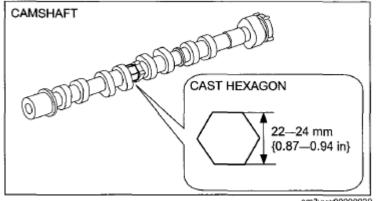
Ensuring Clearance Between Cam/Rocker Arm And Wrench
